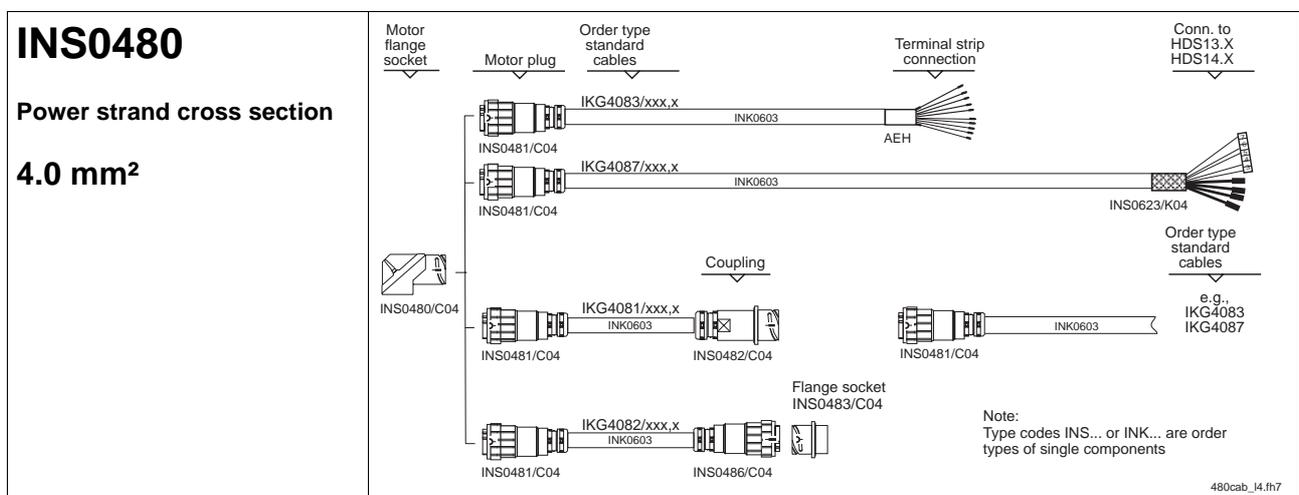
Motor power cable 4.0 mm<sup>2</sup> of flange socket INS0480
